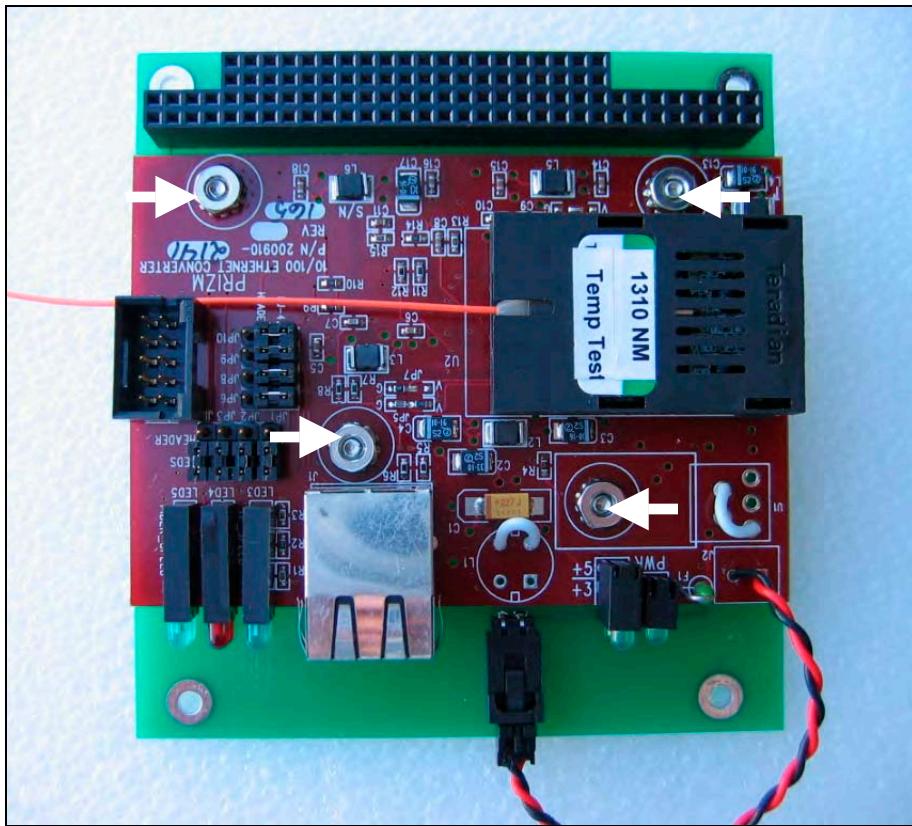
PC/104 card after installation of FO module. Note mounting screw locations.
